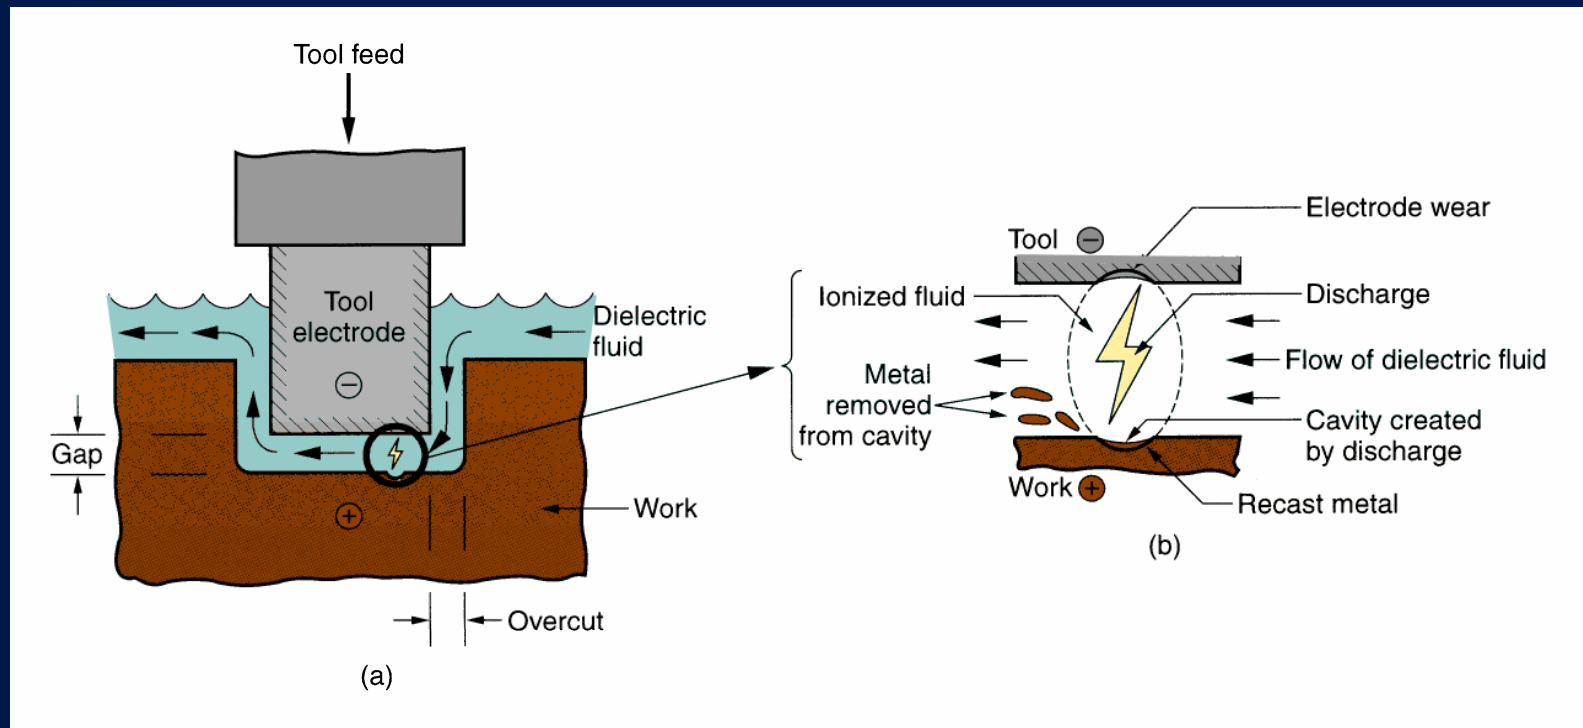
Electric discharge machining (EDM): (a) overall setup, and (b) close-up view of gap, showing discharge and metal removal
